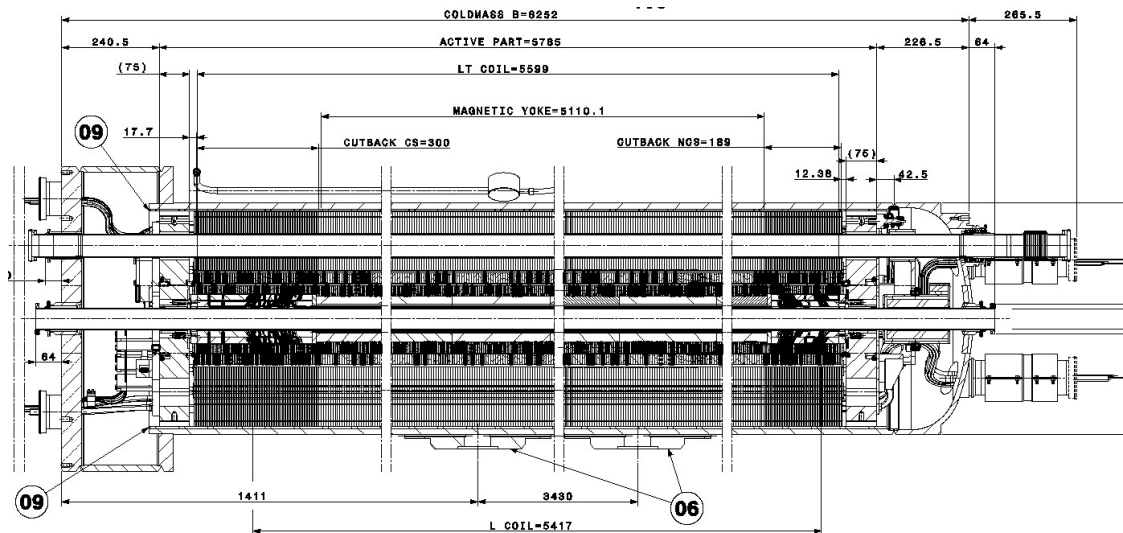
Longitudinal section of the cold mass assembly LMBHB (LHCLMBH_0002)
